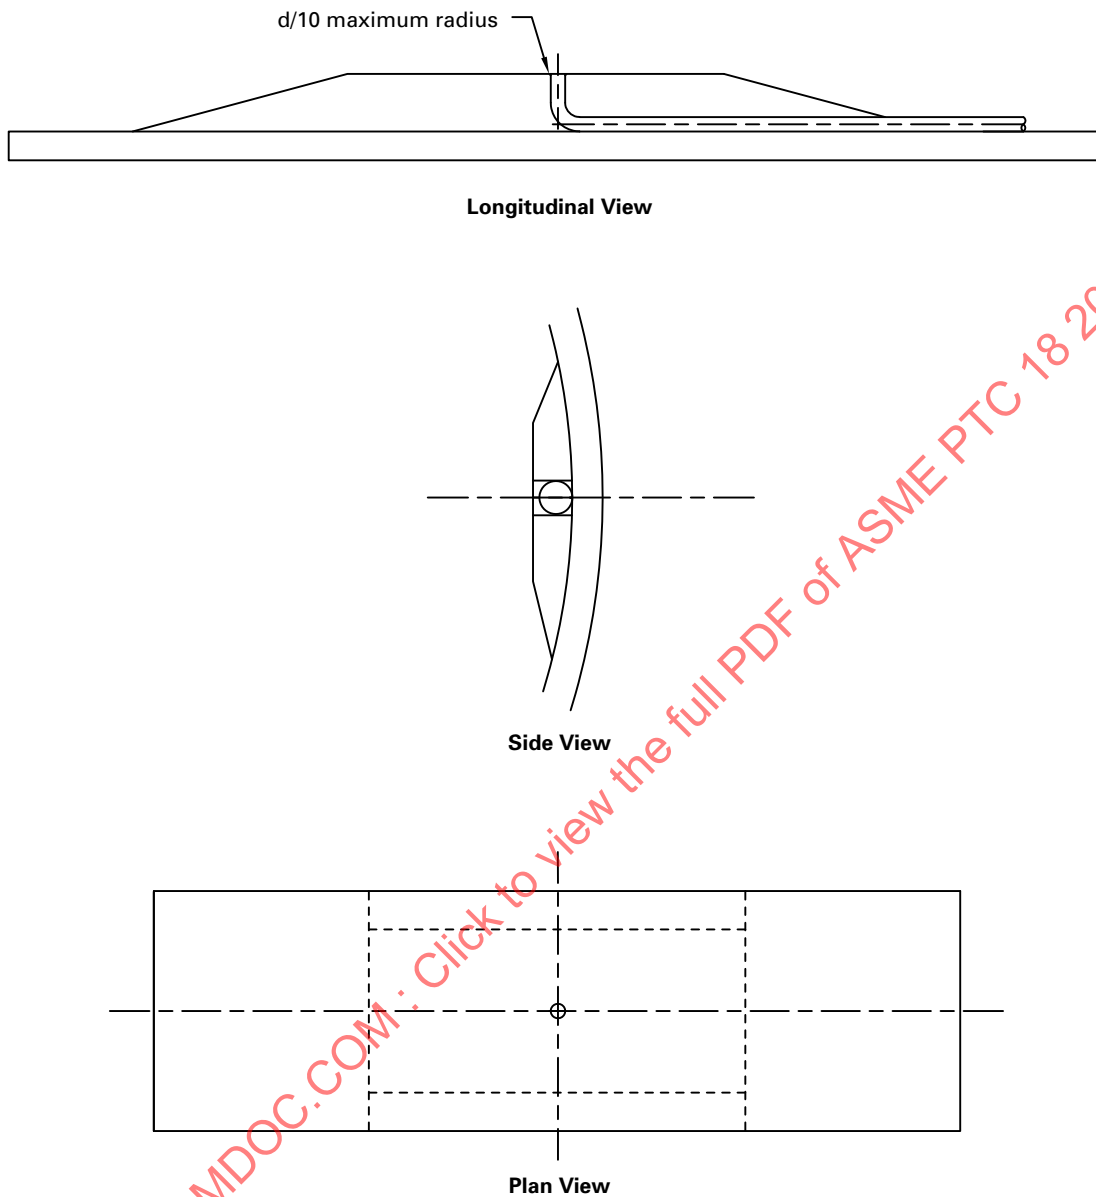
Pressure plates shall be a minimum of 350 mm (14 in.) long, and a maximum of 25 mm (1 in.) thick with 15 deg or 3:1 semi-elliptical leading and trailing edges (or more gradual taper). The pressure tap shall be in the center of the plate and meet the requirements of Figure 4-3.14-1. Installed tubing shall conveniently exit the conduit without disrupting flow streamlines for static pressure measurement. Experimentation has shown that 5 mm ( $\frac{3}{16}$  in.) weld beads do not have a measurable effect on piezometer plate measurements. Installation welds should be ground so as not to influence measurements. Where practical, the internally mounted tubing should be run downstream to a point at least 1 diameter from the centre of the meter section before any circumferential tubing is installed.
